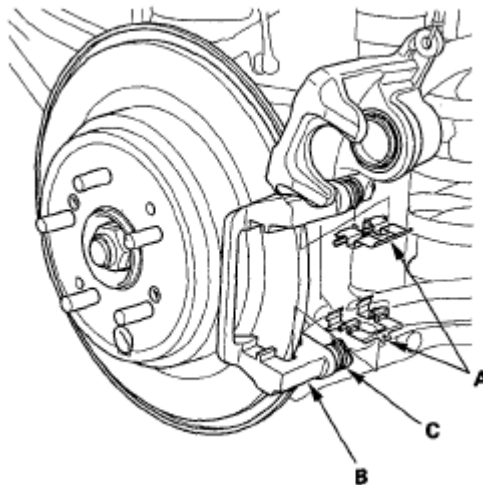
Identifying Pad Retainers, Caliper Bracket And Caliper Pins
